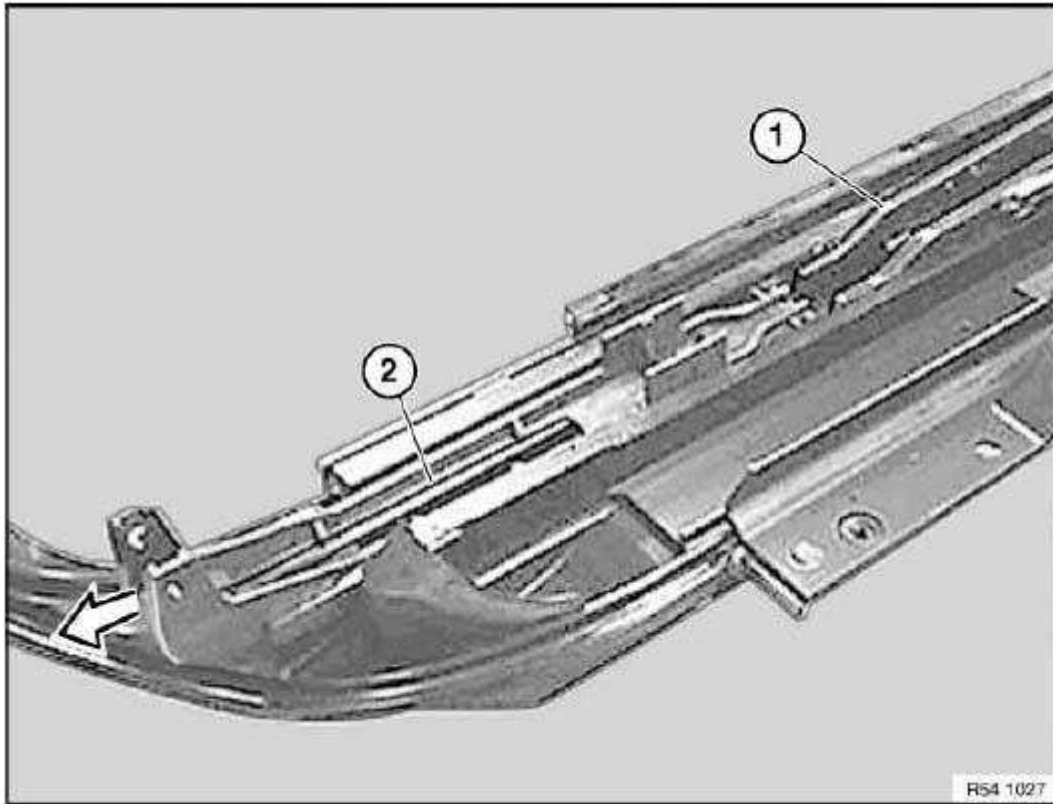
Sliding Drip Molding Carrier With Lower Connecting Link
